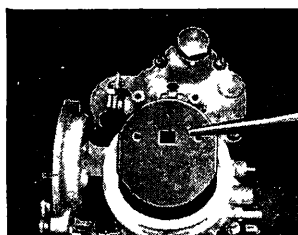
Install choke valve. Seat valve by tapping lightly. Hold in place with fingers before tightening screws. Valve or shaft must not bind in any position
